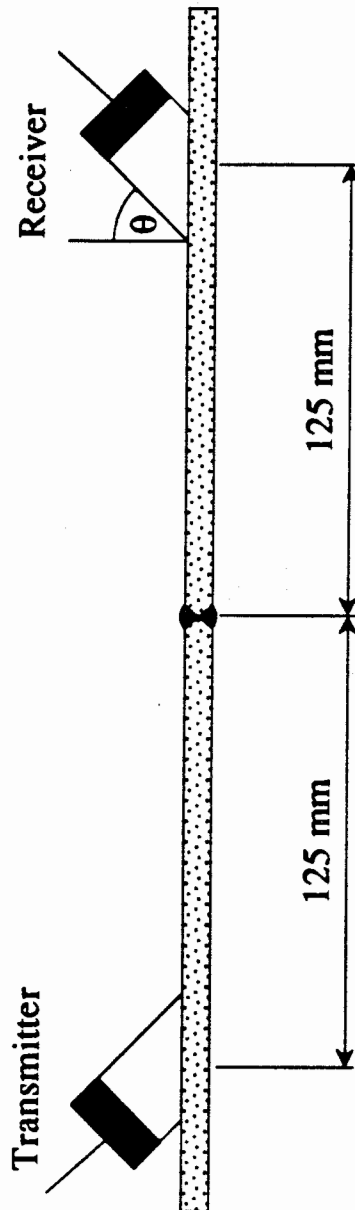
Schematic representation of a 3.12 mm thick 350 mm long butt welded steel plate.
